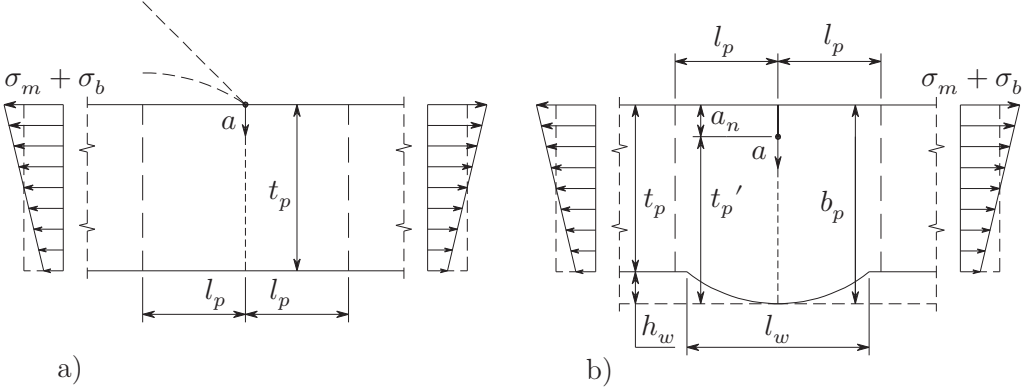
Single edge crack at a) weld toe- and b) at (weld) root notch.
